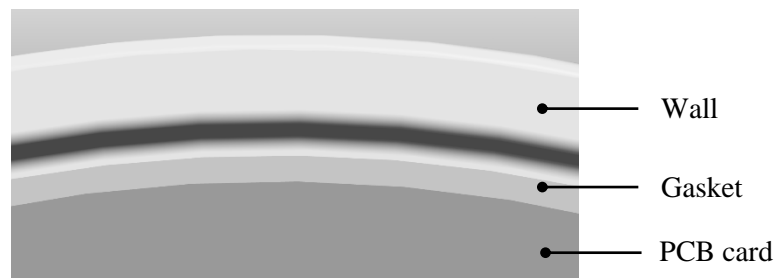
Top view of PCB holder, gasket and PCB card.
